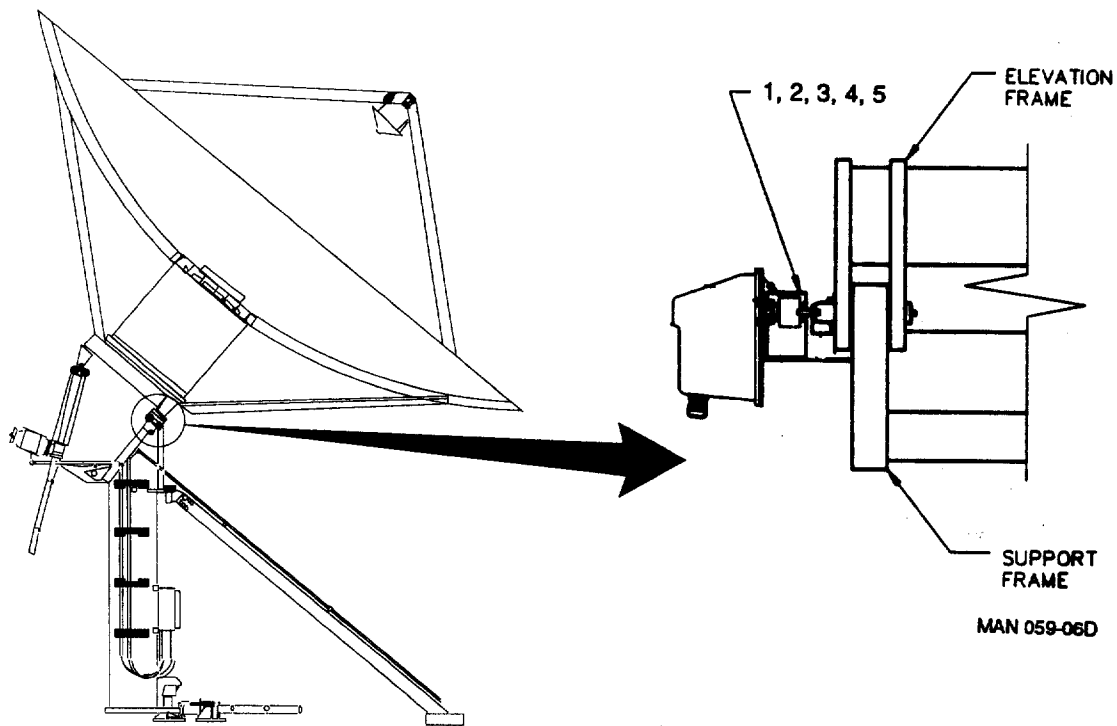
Connecting LSR Assembly To Elevation Driver
